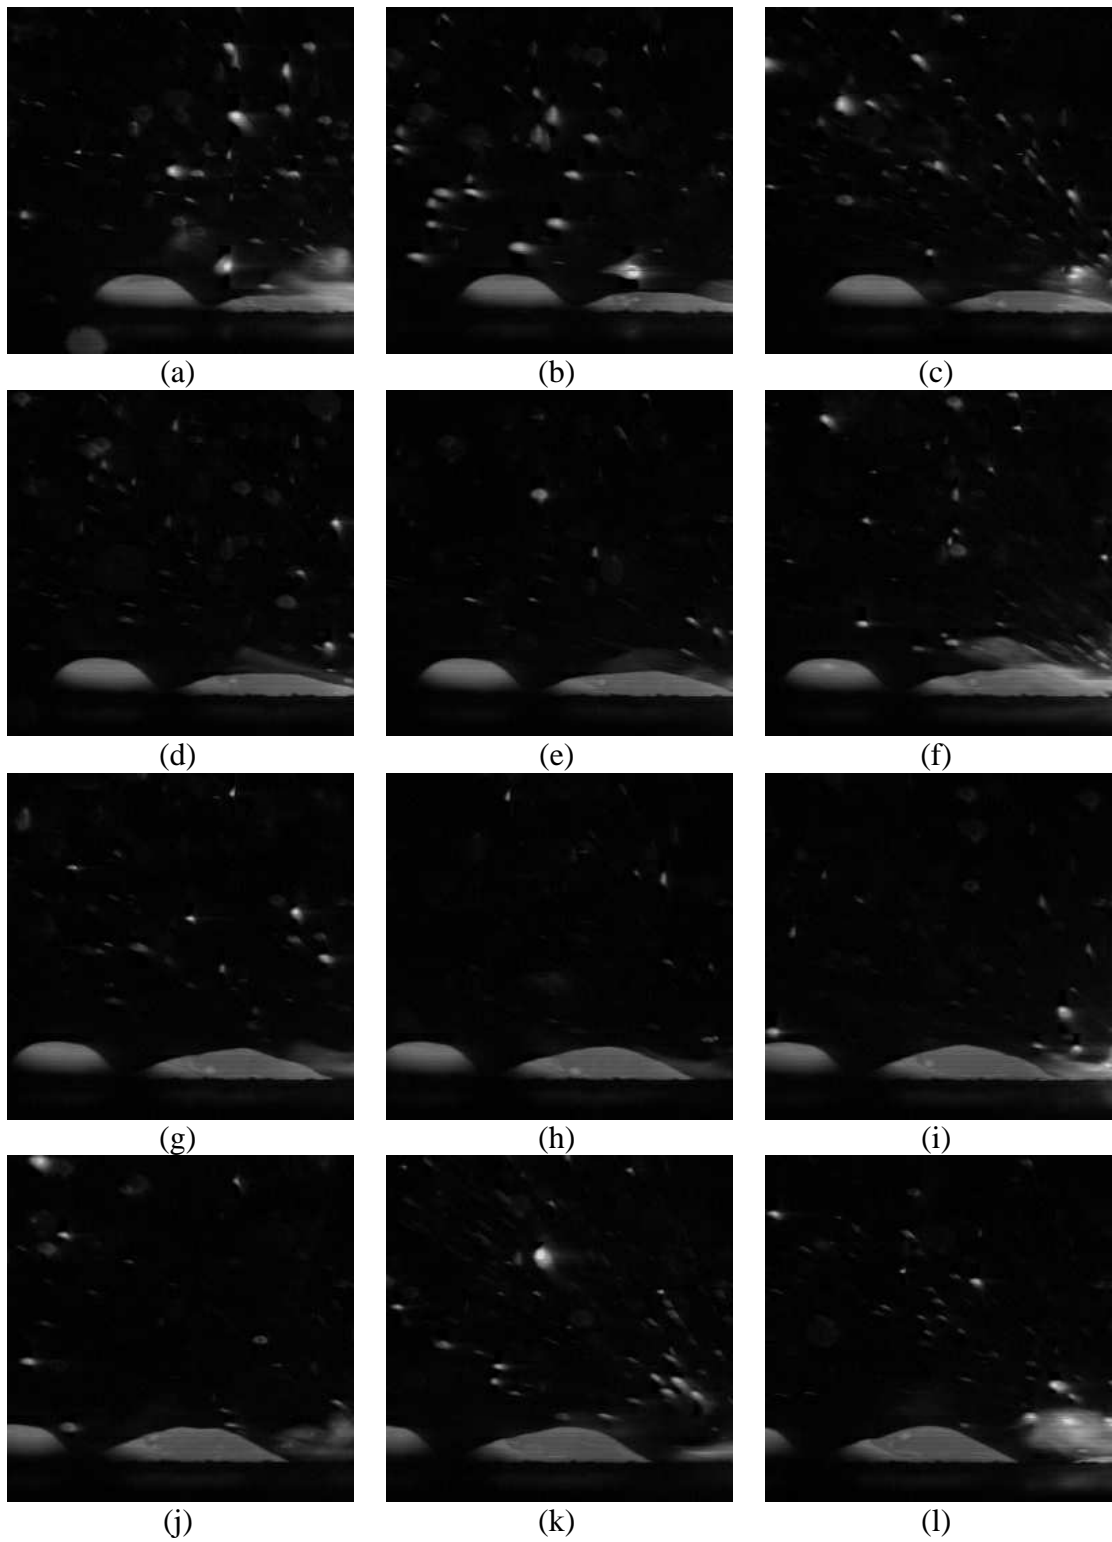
HSV Sequence for GMAW-P Weld 72805c WFS 15.2 m/min, TS 2.5 m/min, 225 A, 31 V, 19-mm CTWD
